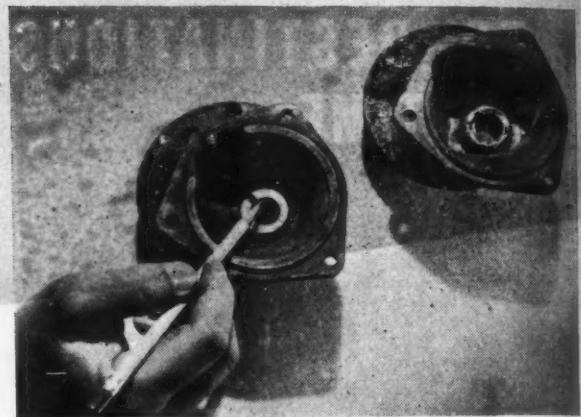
Water pump case is renewed by welding and spot facing to size, saving critical parts and material
